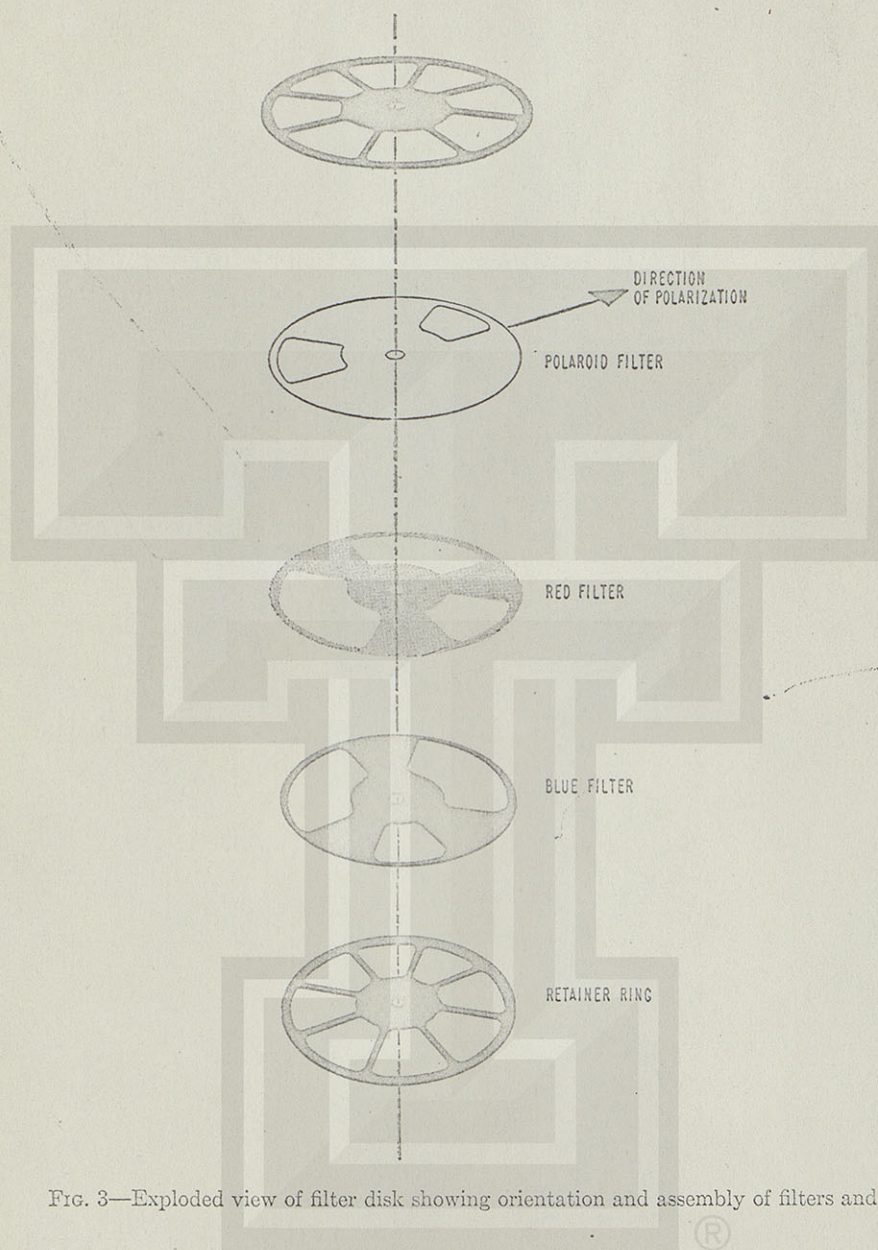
Exploded view of filter disk showing orientation and assembly of filters and Polaroid
